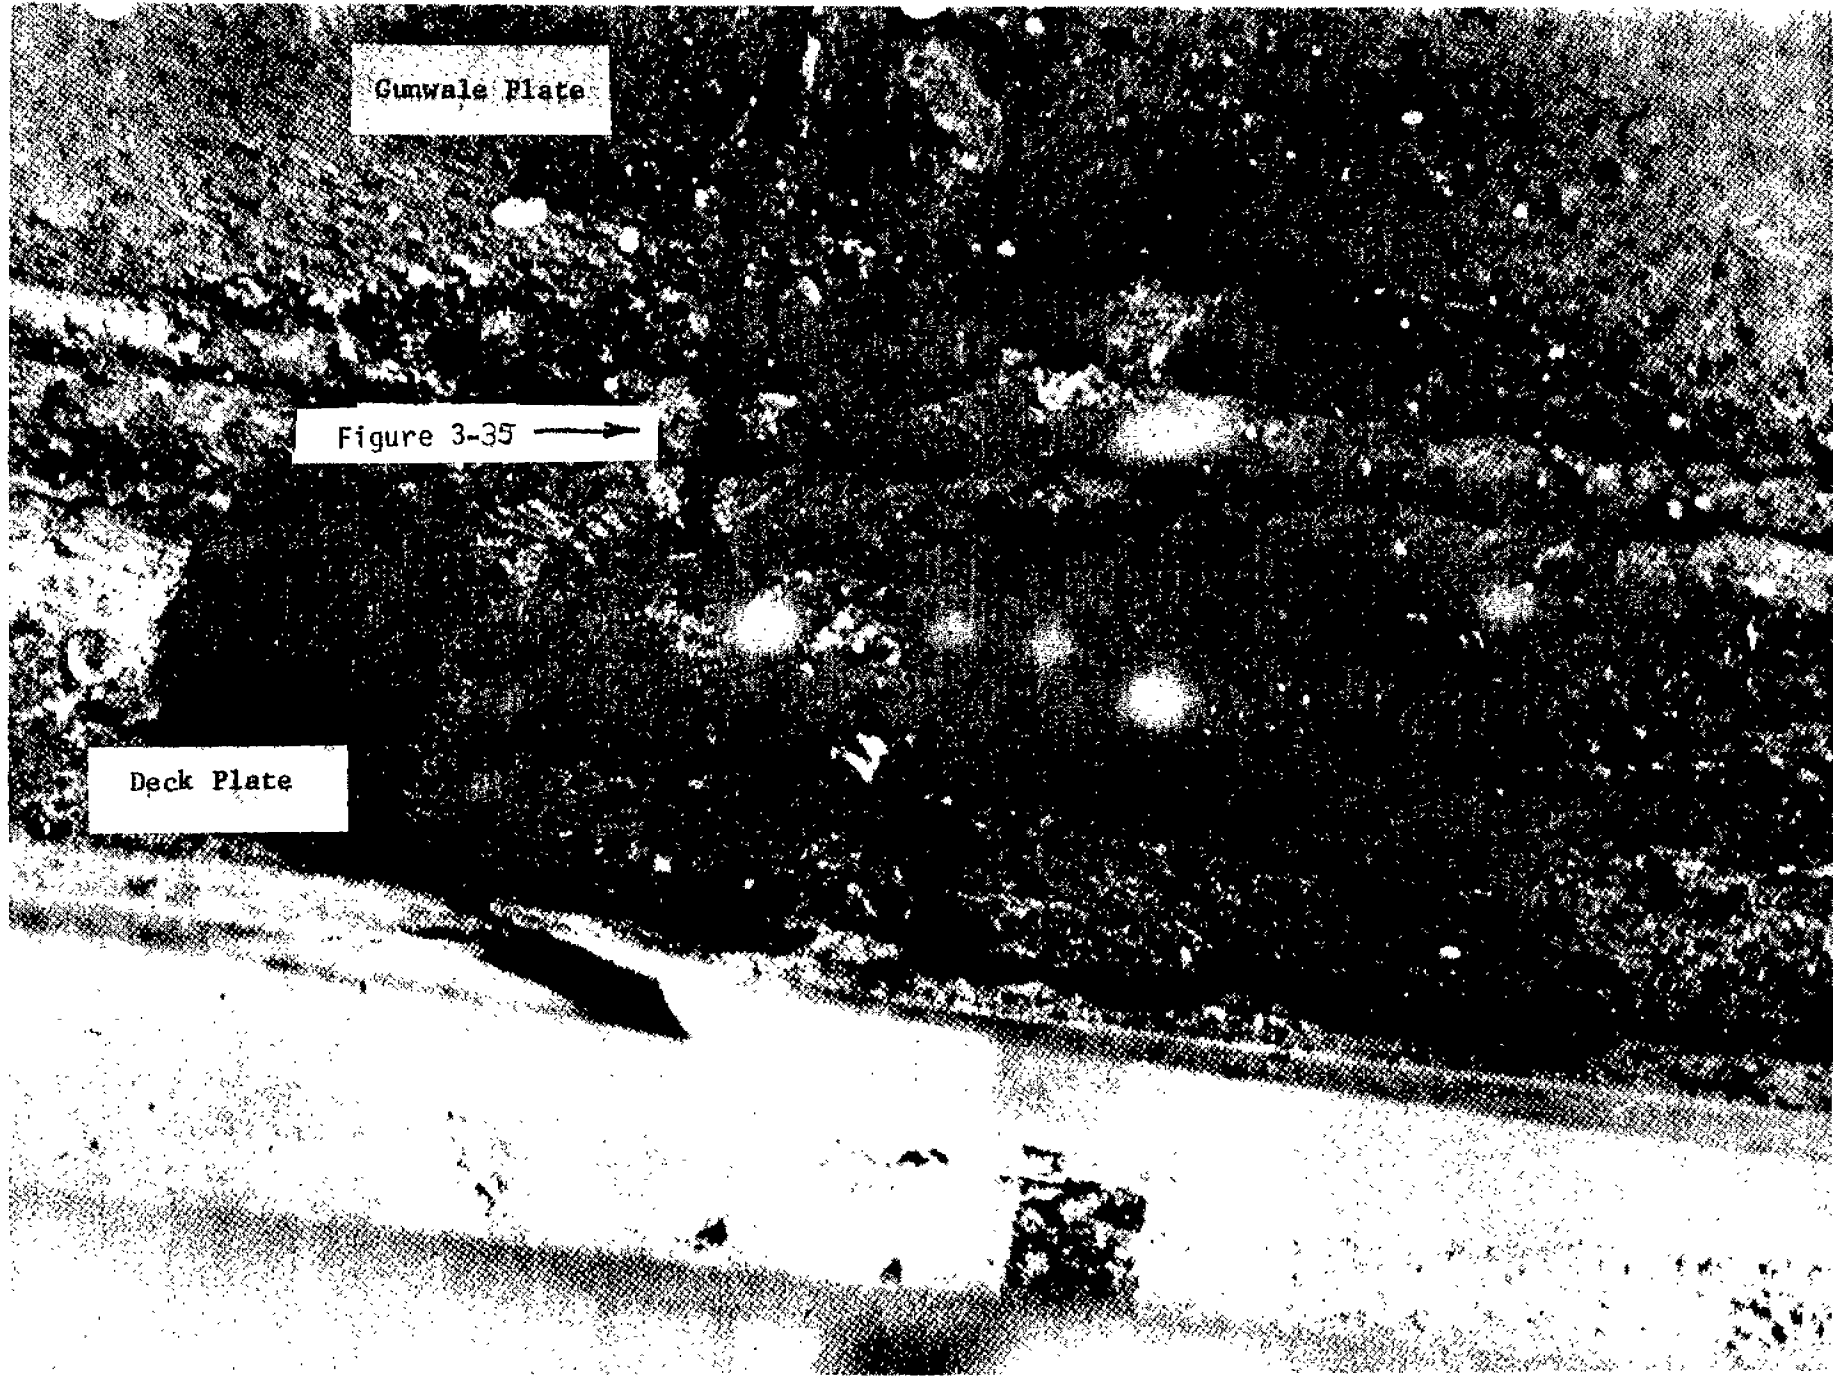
Fracture as it passes from the gunwale plate onto the deck. Note path of fracture leaves the weld in the gunwale plate and runs parallel to the gunwale/deck weld.
